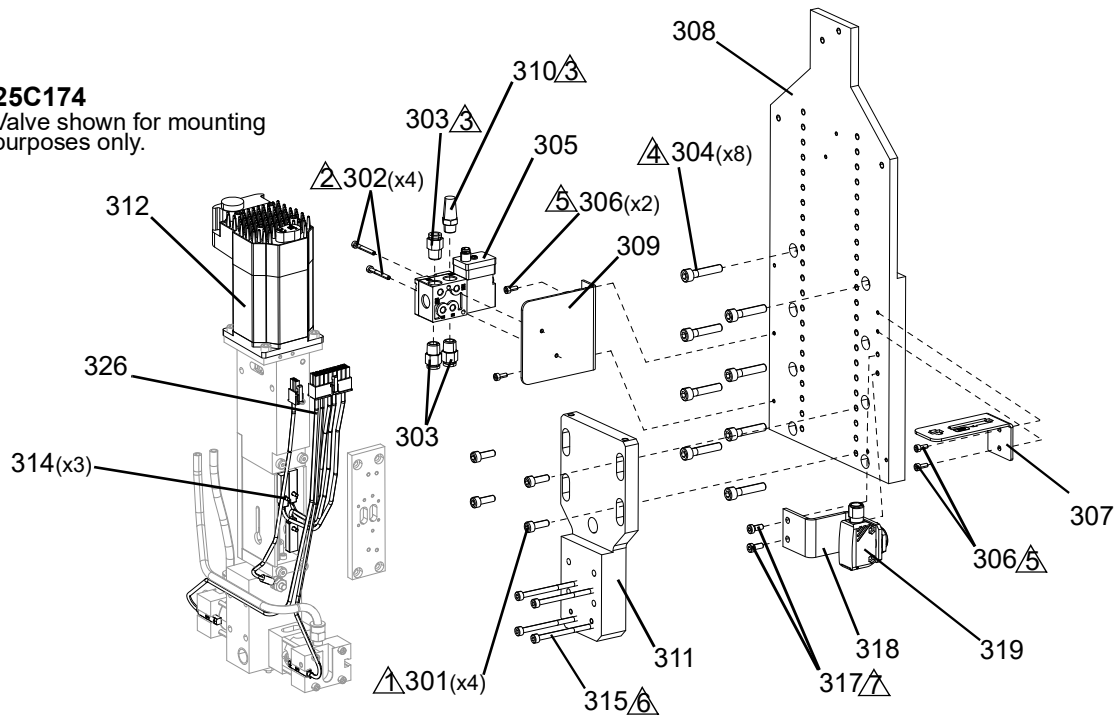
1093 Valve Holder and 1053 Valve Holder
